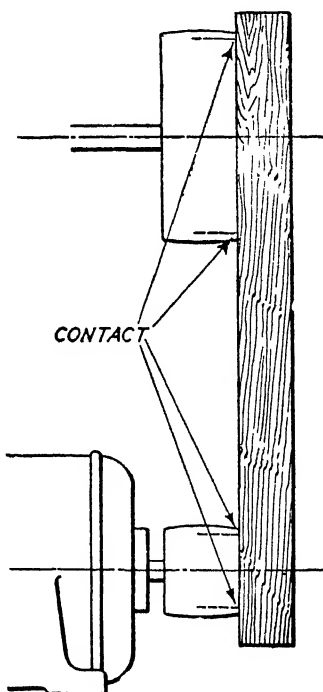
ALIGNING PULLEYS—STRAIGHT-EDGE METHOD
